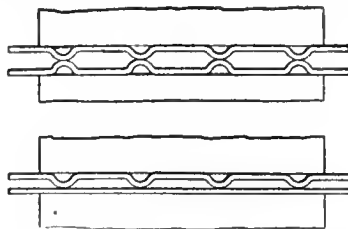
METAL SHEETS ARRANGED FOR SPOT WELDING
